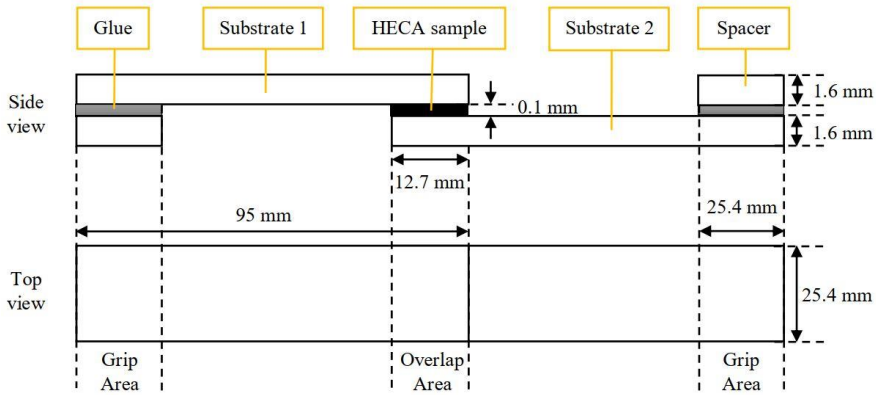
Detailed schematic drawing of HECA sample preparation for lap shear test
